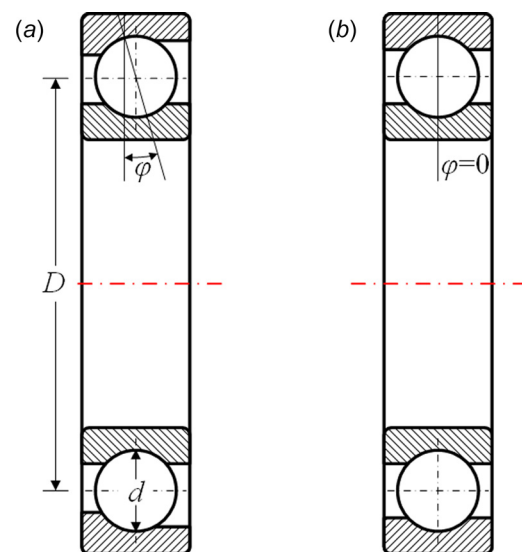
Structure of ball bearings: (a) angular contact ball bearing and (b) deep groove ball bearing
